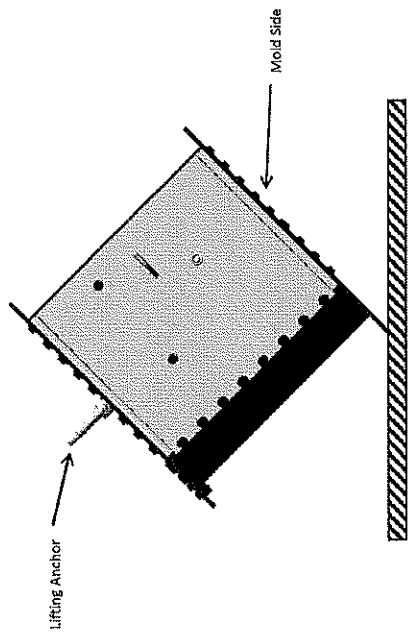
RENDER OF THE PSR MOLD BEING LIFTED FROM THE SIDE LIFTING EYES TO ORIENT THE MOLD FOR DISASSEMBLY.
